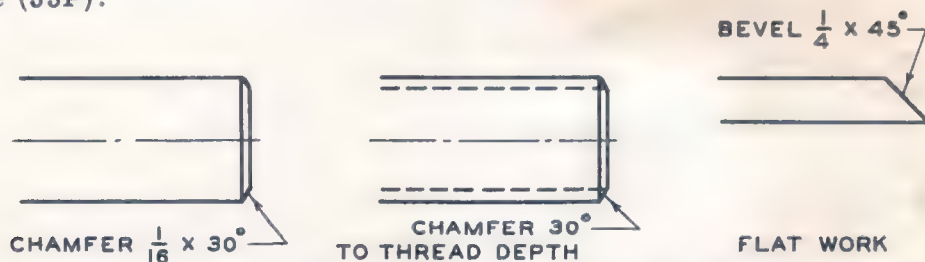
DIMENSIONING CHAMFERS AND BEVELS
